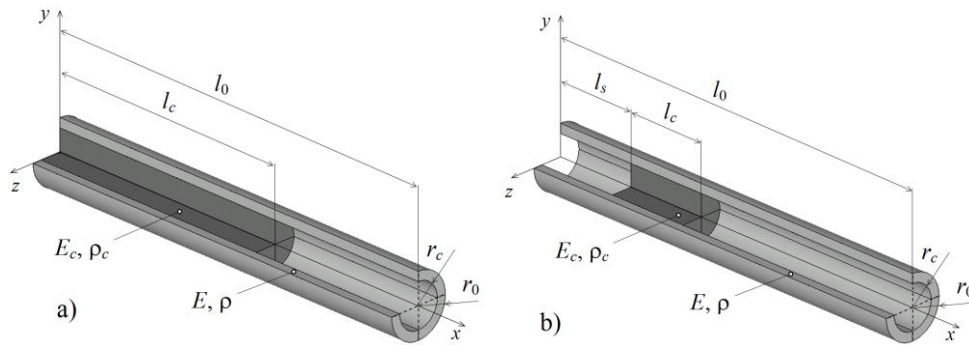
Models of reinforced beam structures (a - Type I, b - Type II)
